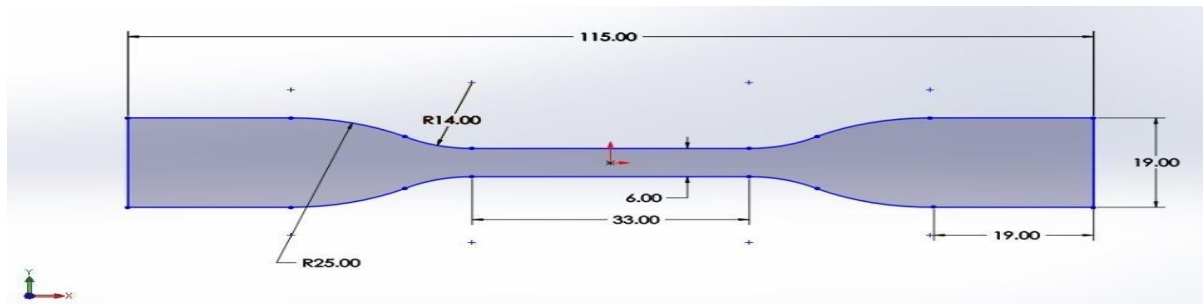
Sketch of ASTM D638 Type-IV tensile Test specimen modelled in Creo.
